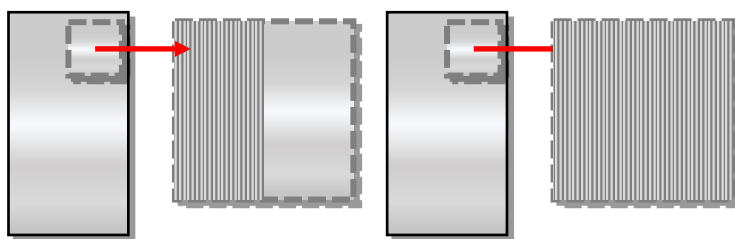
The types of surfaces produced on the cut aluminium alloy samples.
